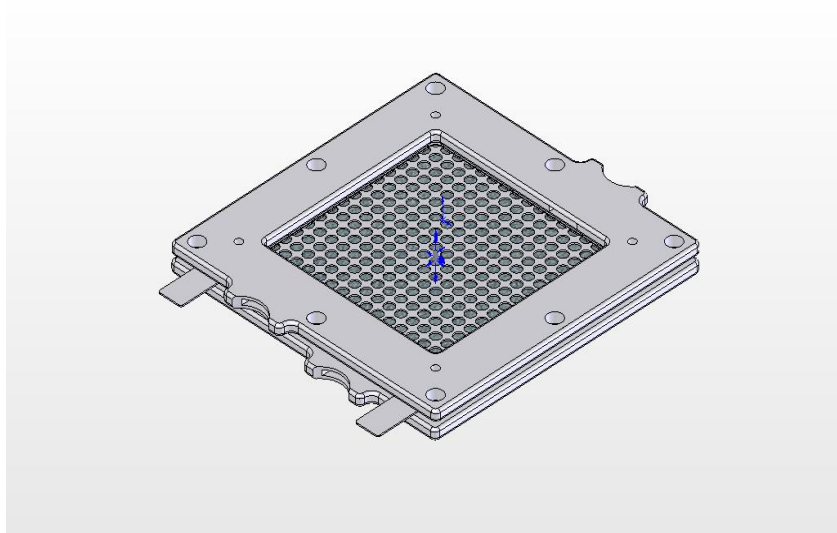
A SolidWorks® CAD isometric drawing of a single cell fuel cell, the trough, the meshed plate electrodes, inlet and outlet ports can be seen (Drawing to scale)
